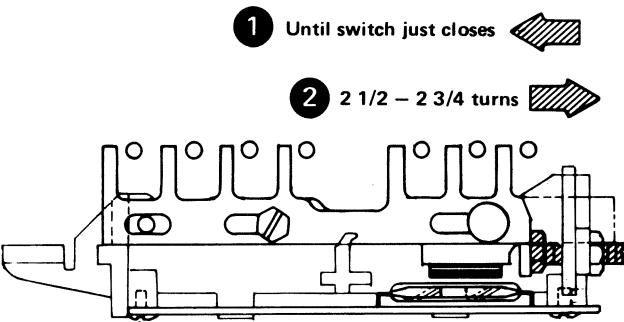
Strobe Transmit Interposer Home Position (Level 2)
